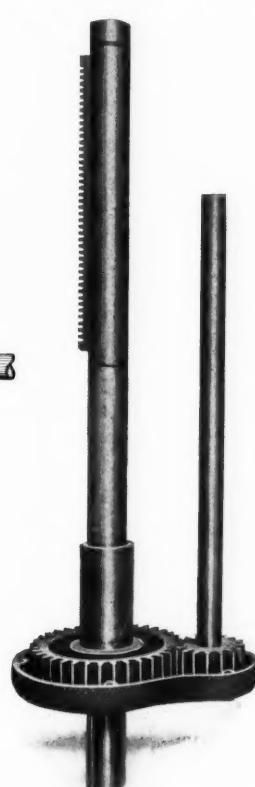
The Spindle with Large Diameter Driving Gear, close to the Drill
